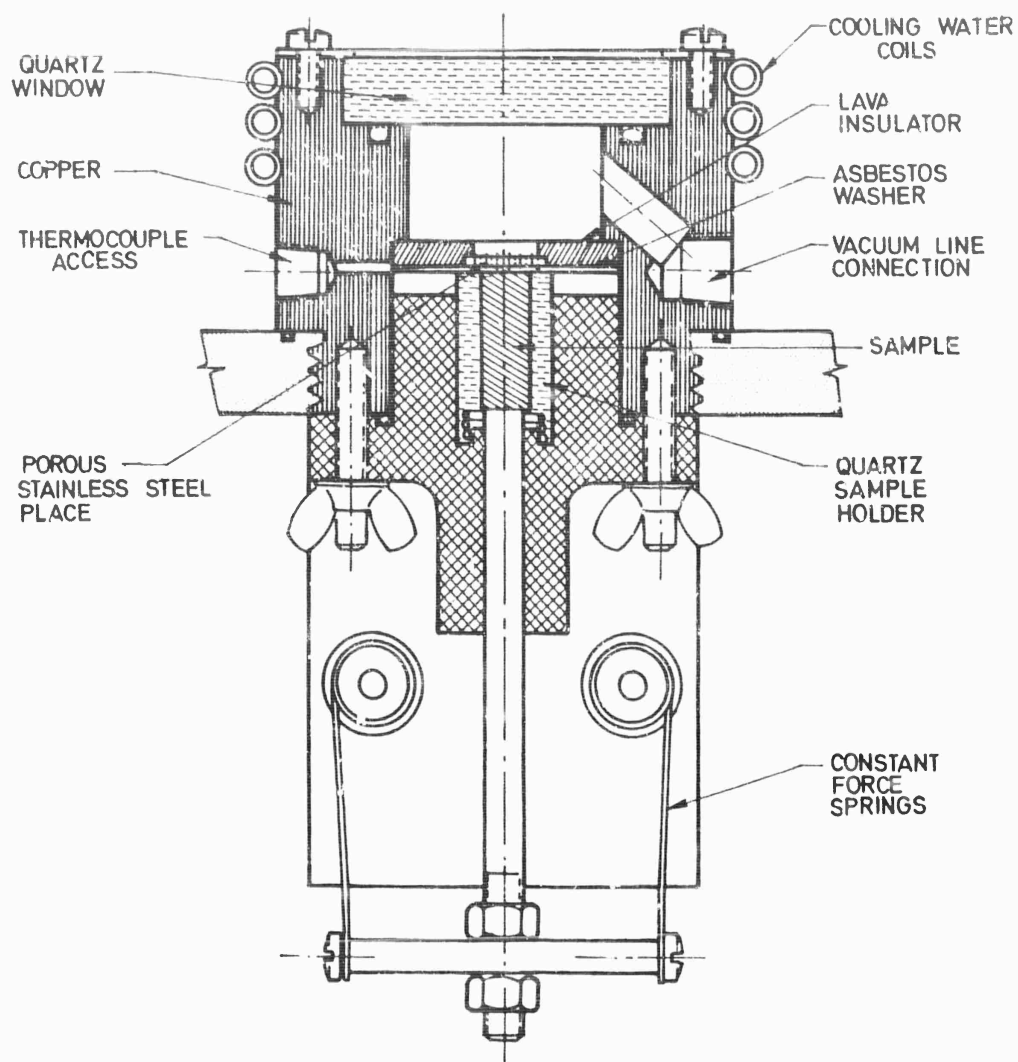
Assembly drawing of porous plate holder and sample positioning mechanism (Coates)
